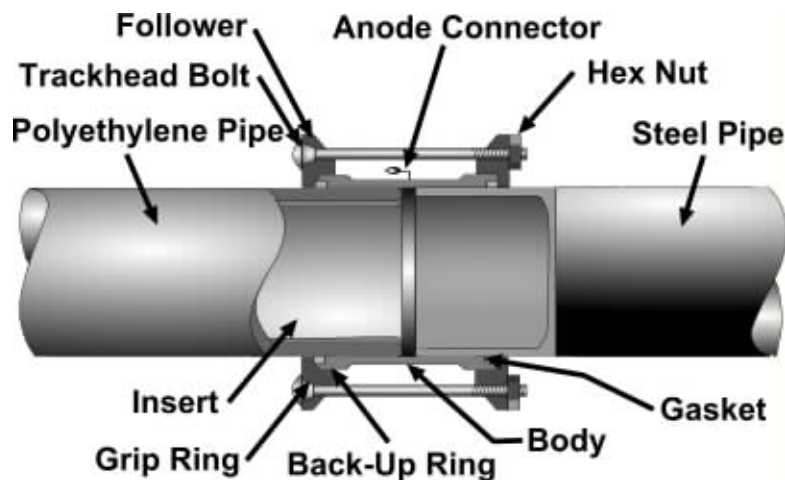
Bolt Type Mechanical Coupling for Joining Steel Pipe to Polyethylene or for Joining Two Polyethylene Pipes
